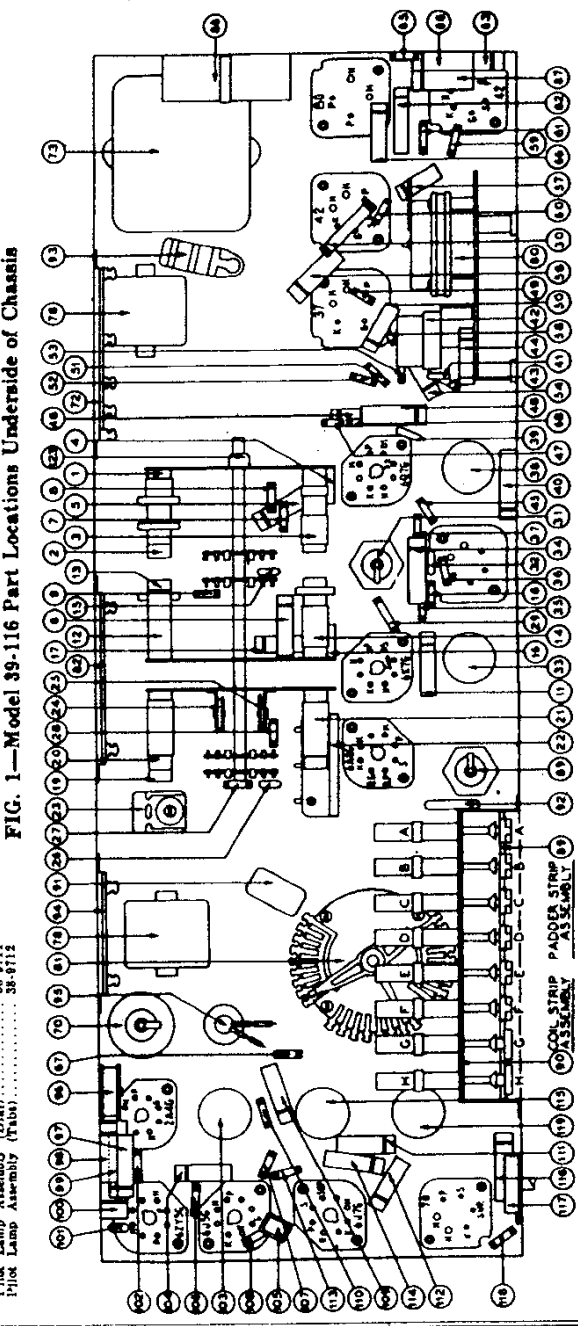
Model 39-116 Part Locations Underside of Chassis
